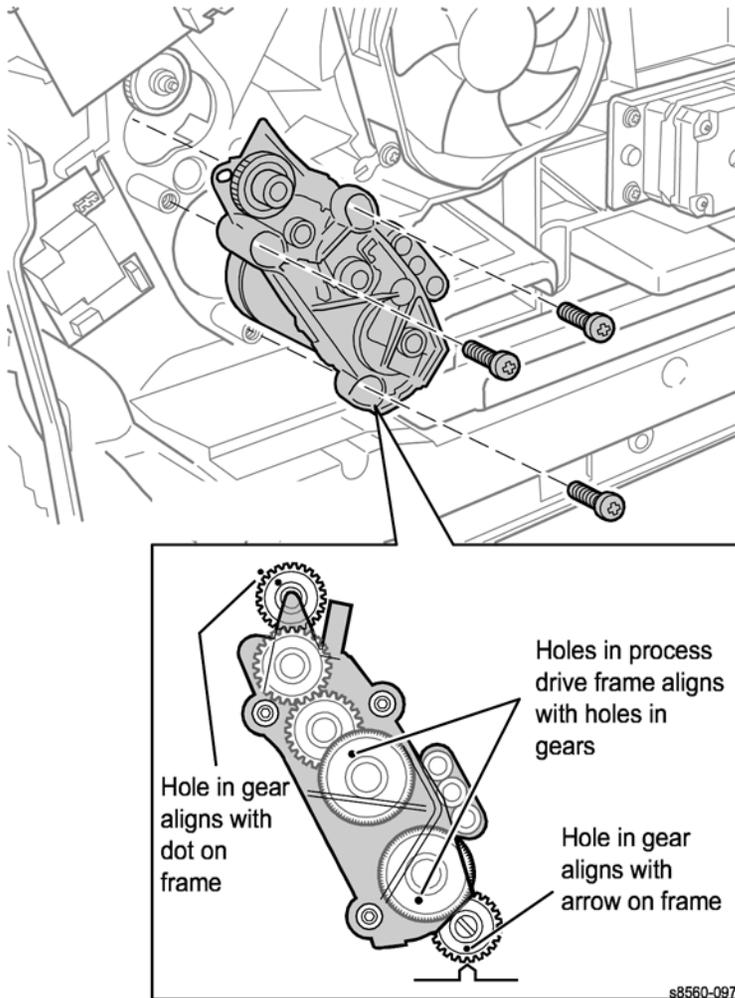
Removing the Process Drive and Process Drive Gear Alignment
